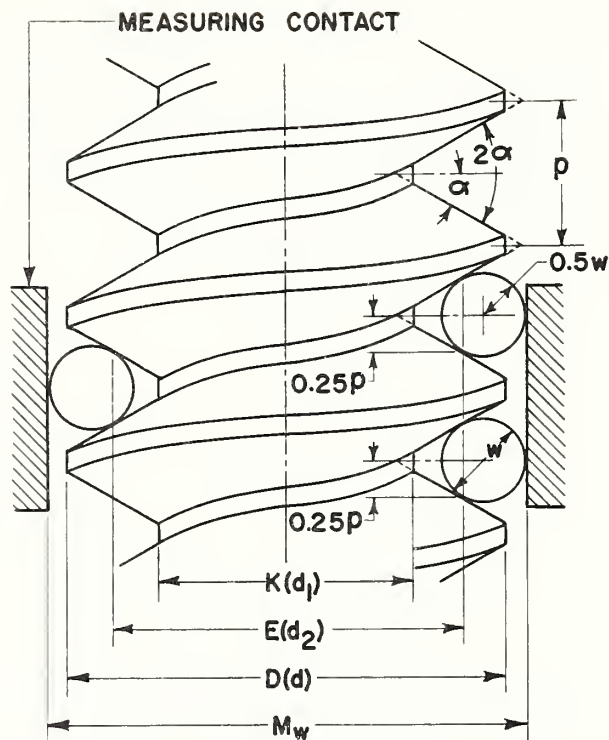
Three-wire method of measuring pitch diameter of straight thread plug gages.
